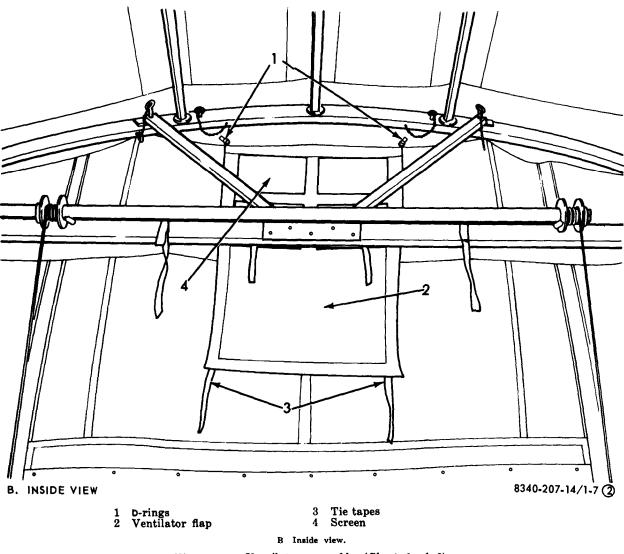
Ventilator assembly (Sheet 2 of 2).
